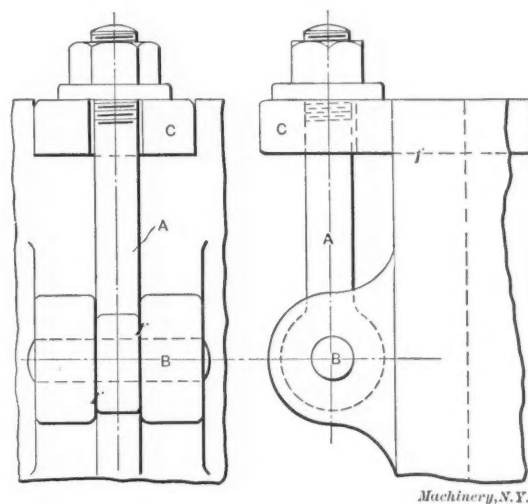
Eye-bolt used for Clamping Drill Jig Leaf.
